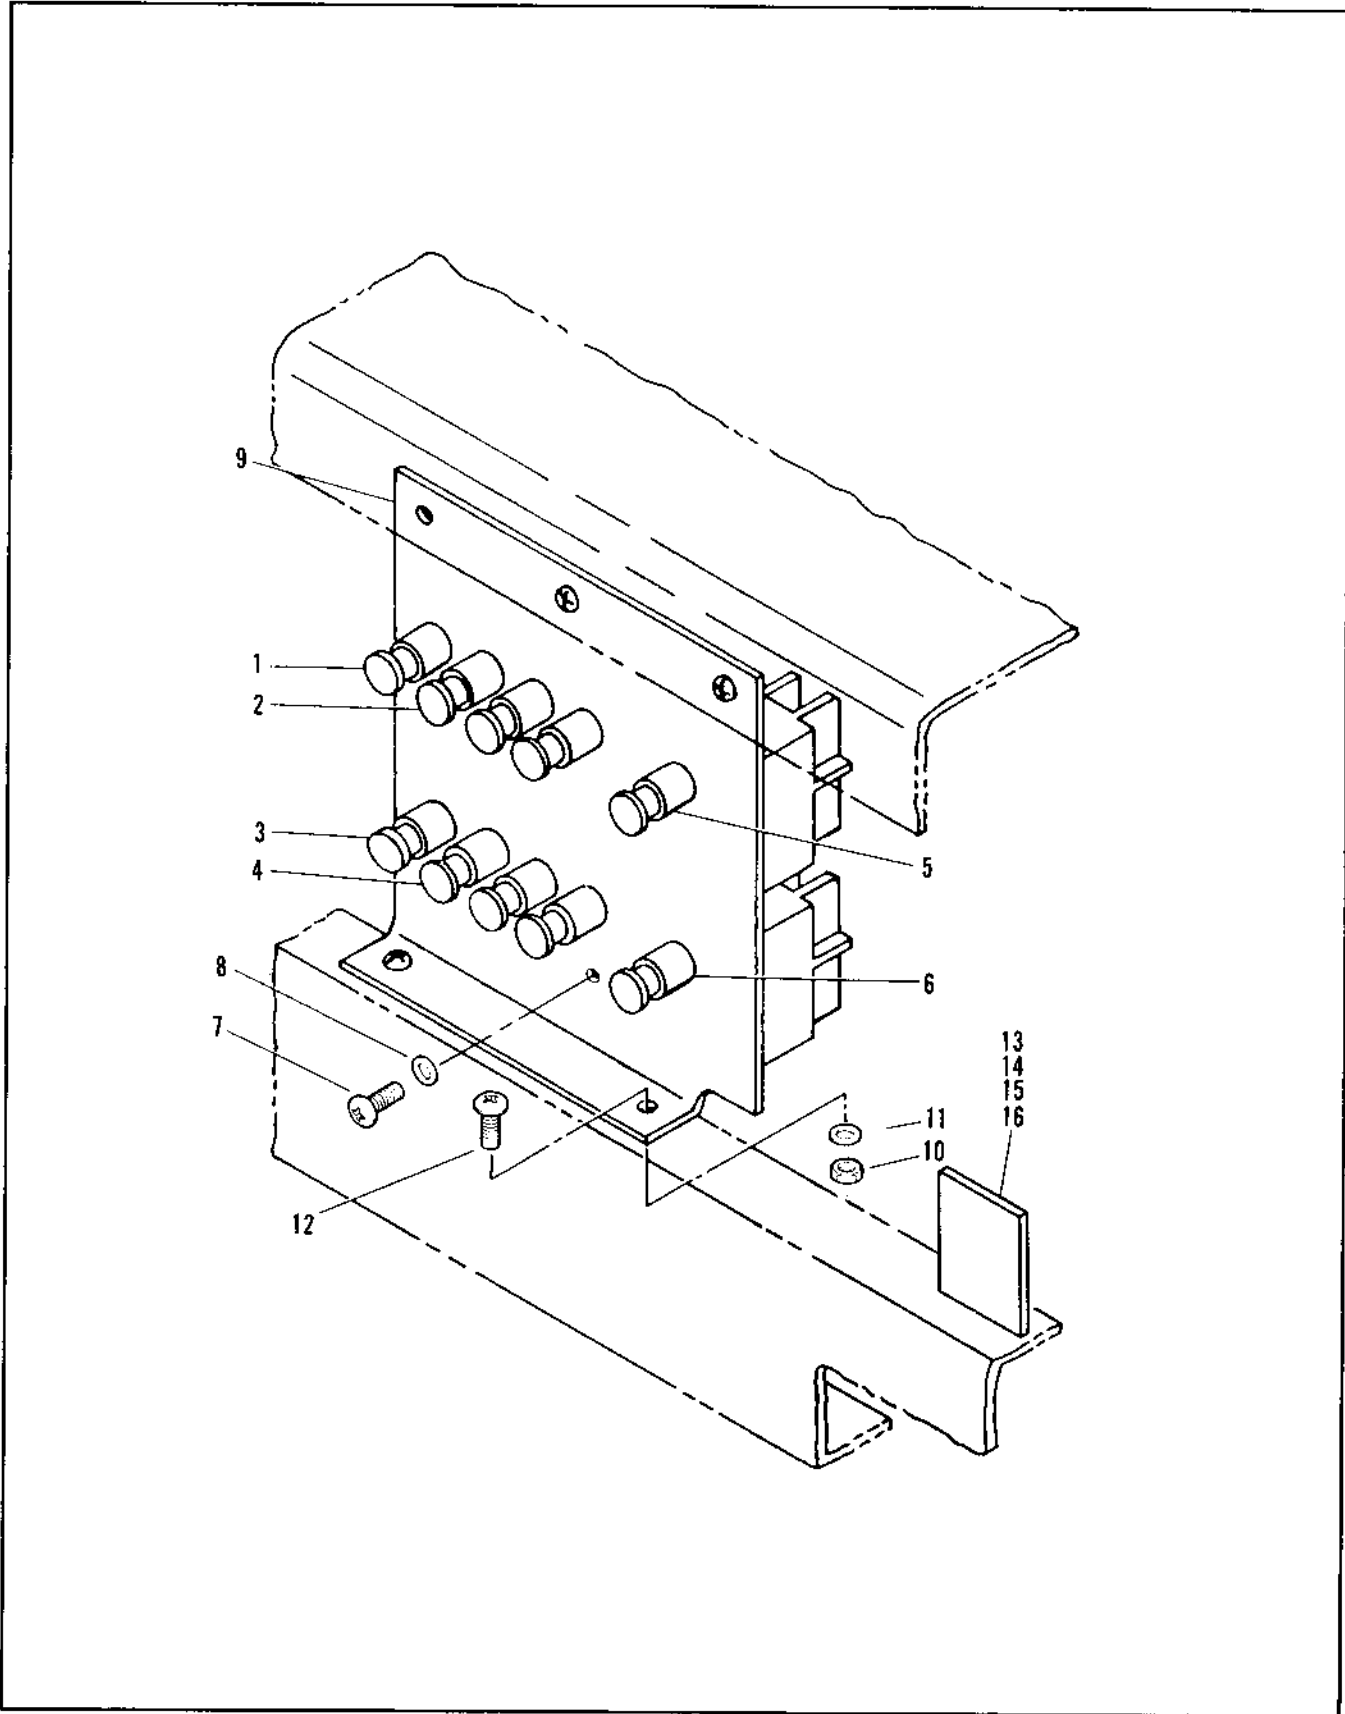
Panel Instl. Nose Wheel Well Circuit Breaker
